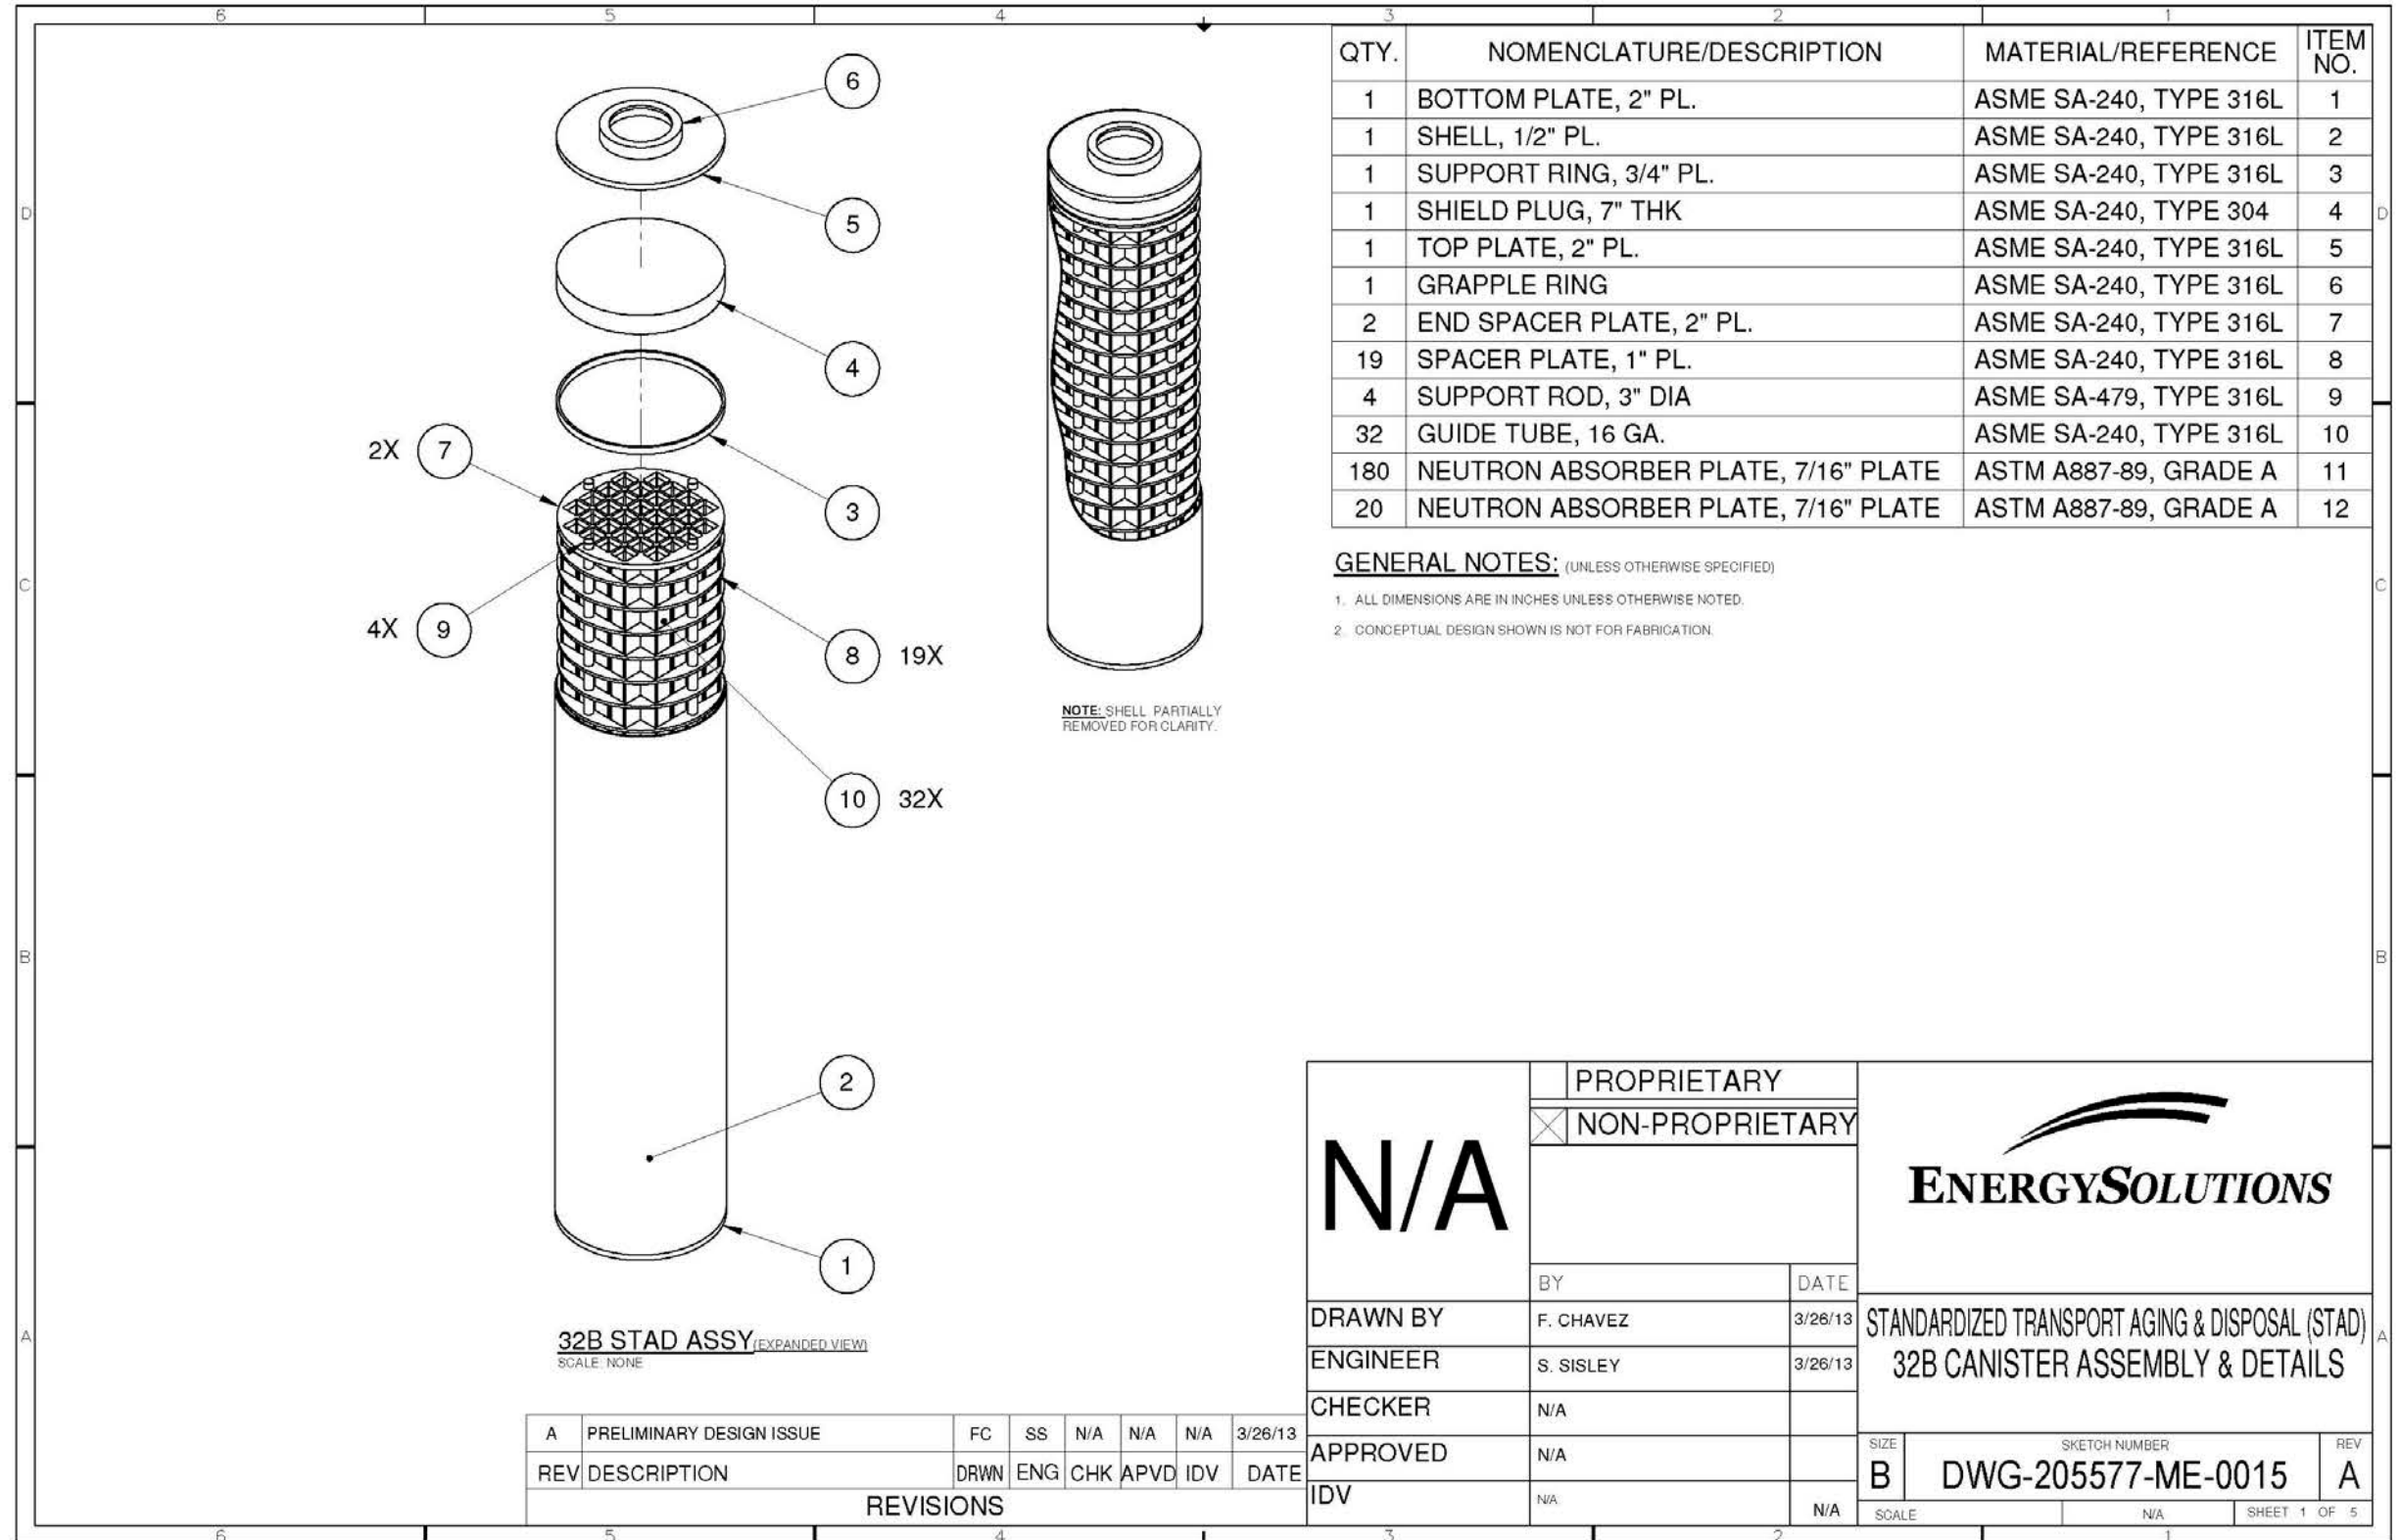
Standardized Transport, Aging and Disposal Canister - 32 BWR Assemblies - Assembly & Details – Sheet 2 of 5
